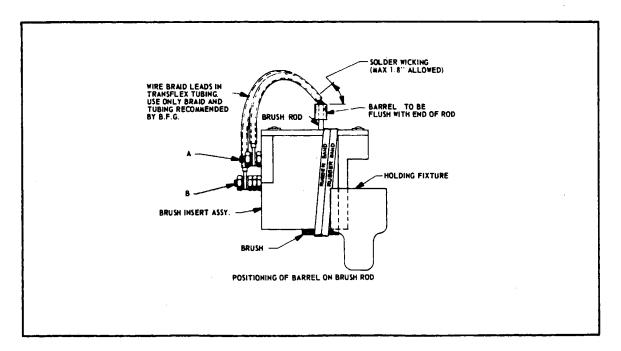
Holding Brushes for Soldering, PA-23-250; PA-23-235; and PA-23-250 (six place), Serial Nos. 27-2000 to 27-2504 incl.
